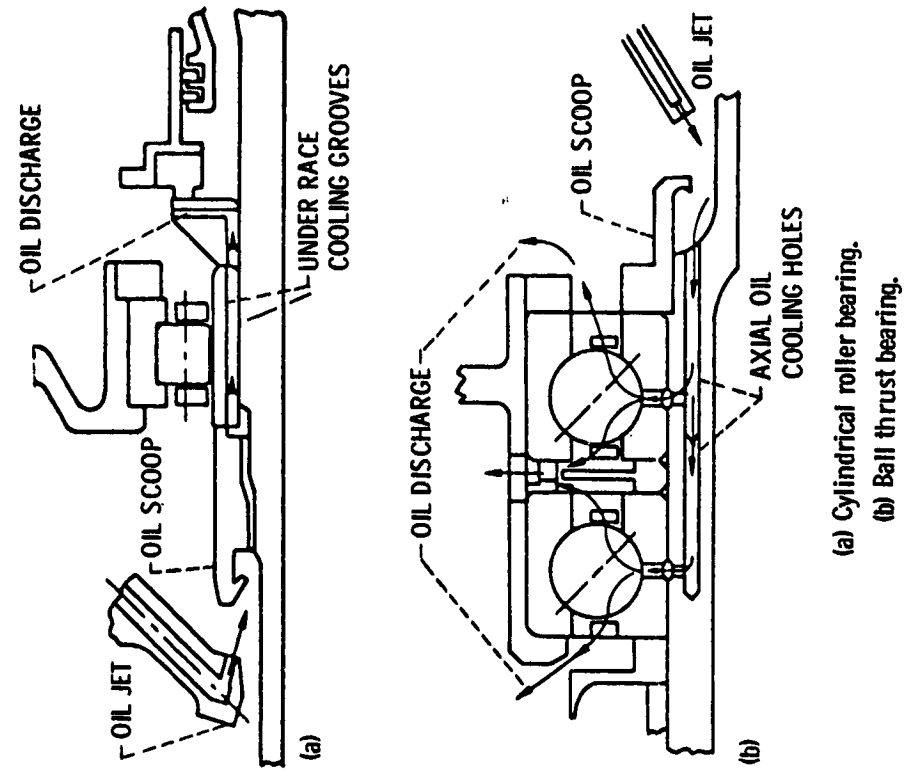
Underrace oiling system for main shaft bearings on turbofan engine.
